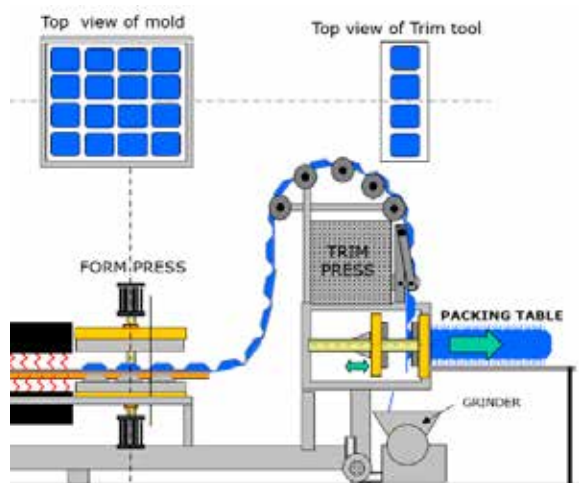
illustration of forming mold and trim tool for post-trim configuration
